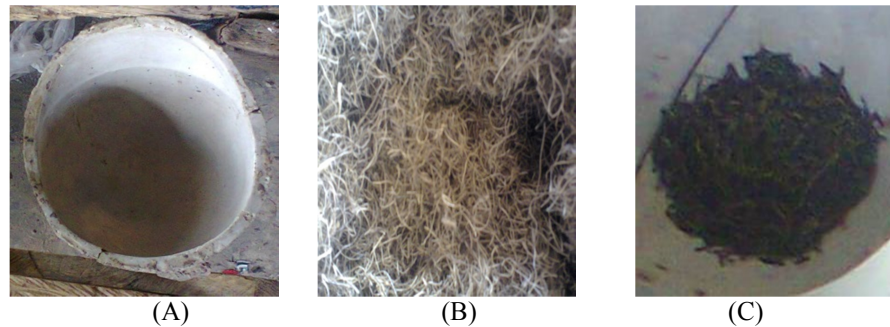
Samples of the fibres as cut to sizes and the casting mould; (A) Helmet open mould (B) stalk of oil palm male flower bunch fibre cut to sizes; (C) oil palm frond fibre cut to sizes.
